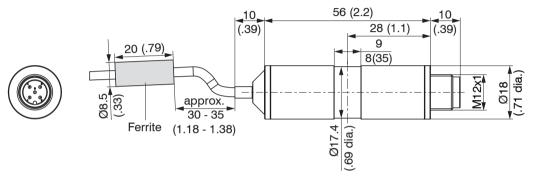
Dimensional drawing of DTD controller, dimensions in mm (inches)
